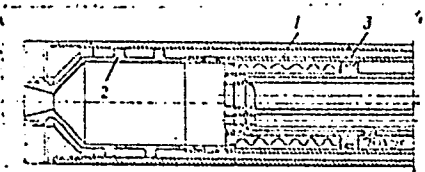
1 - sylphon; 2 - combustion chamber; 3 - piston
